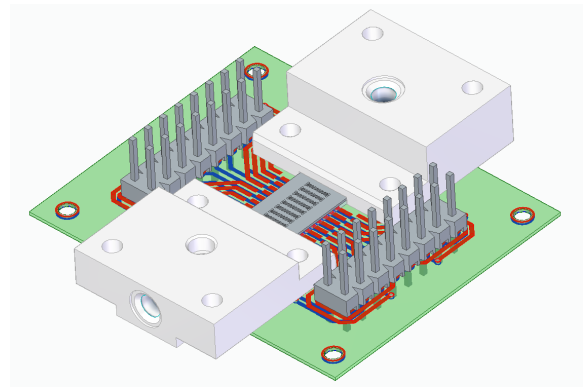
CAD assembly of the VLM thruster without nozzle configuration. Flow direction is from the bottom-left towards top-right.
